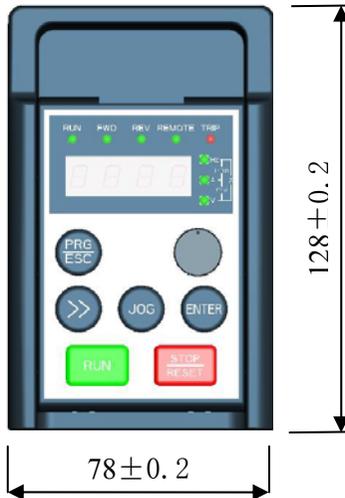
Keypad's tray Installation Dimension (Unit: mm)
